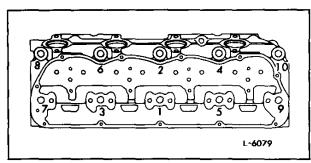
Cylinder Head Bolt Tightening Sequence
